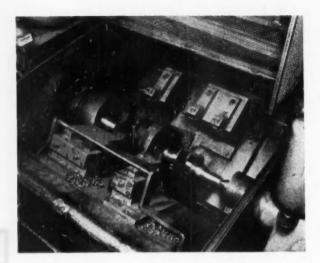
Setup of a Rocket engine crankshaft in which a set of six negative rake carbide tools in rigid holders make intermittent cuts in turning the OD and angular clearance in counterweights.
